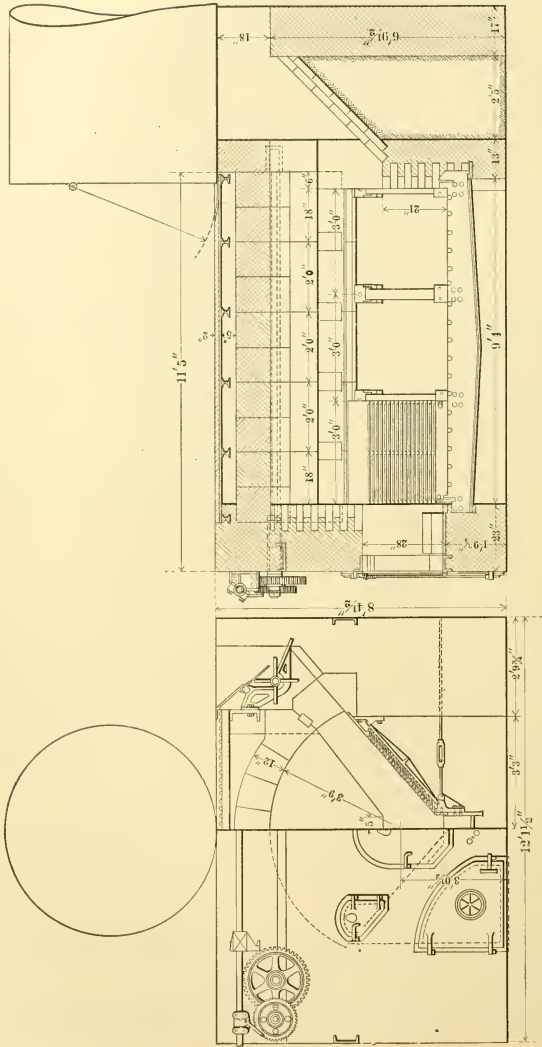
END AND SIDE SECTIONAL ELEVATION OF THE MYERS TAN-BARK FURNACE
